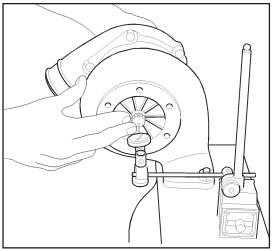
Measuring axial clearance with dial gauge 800109-00288 and measuring stand 850329-00319
